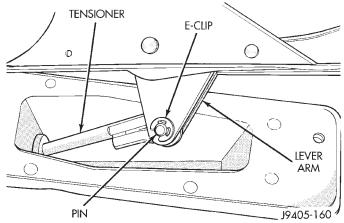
Tensioner E-Clip And Retaining Pin Location
